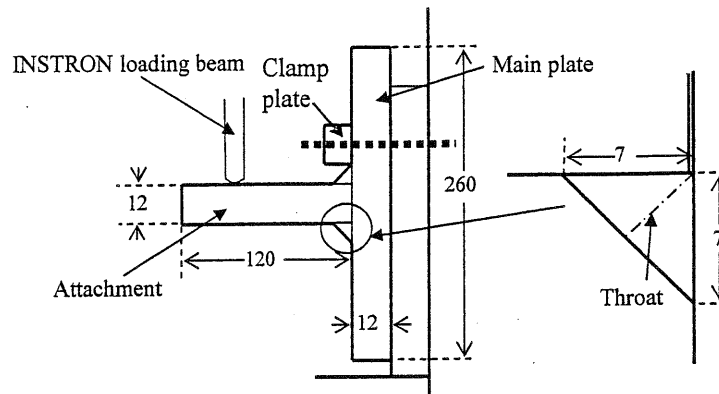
T-joint cross-section with the nominal dimensions of the T1 specimen (in mm)
